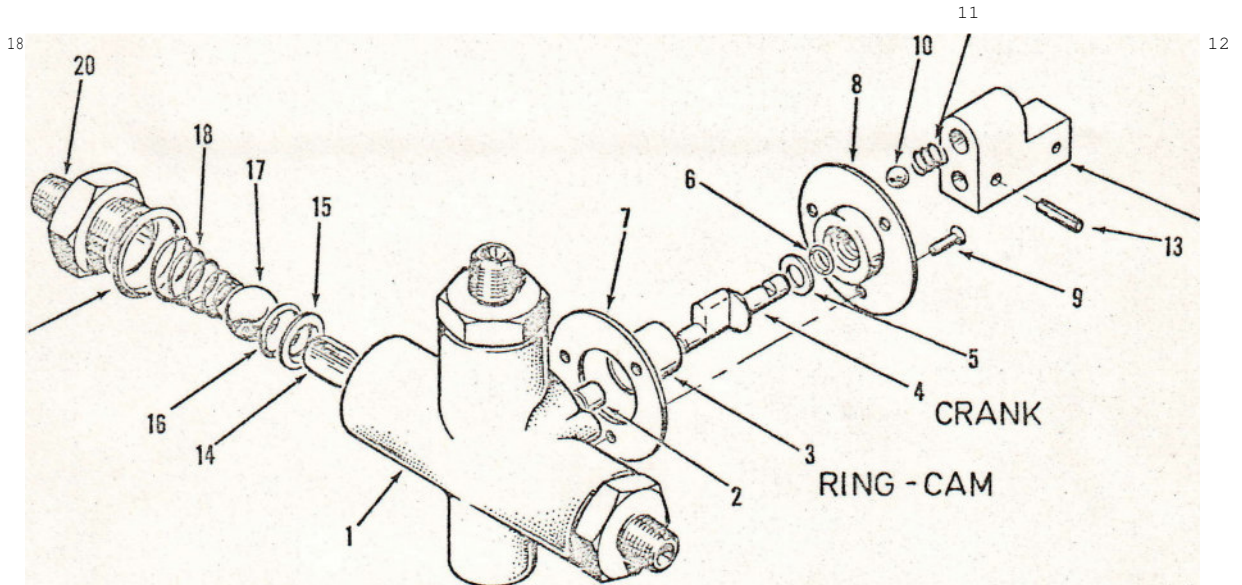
Fuel Selector Valve Assembly (Aux Fuel)
